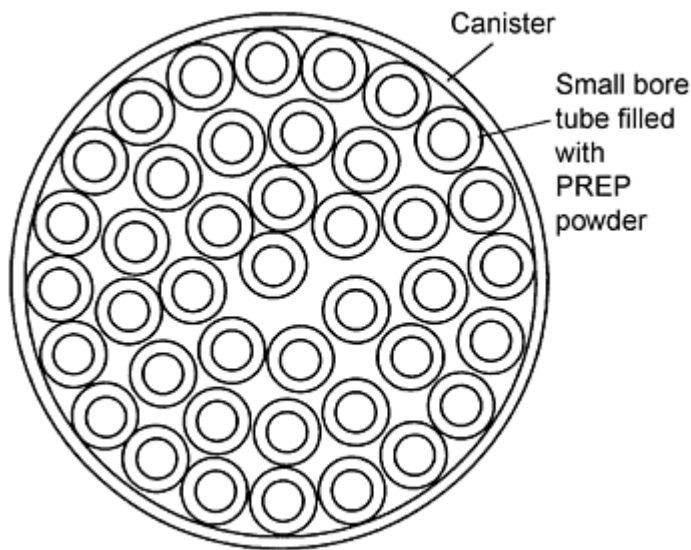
Cross section of extrusion billet to fabricate superalloy weld wires
